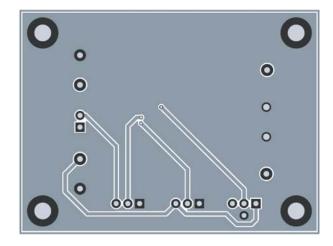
AAT4252A Evaluation Board Bottom Side Layout.
